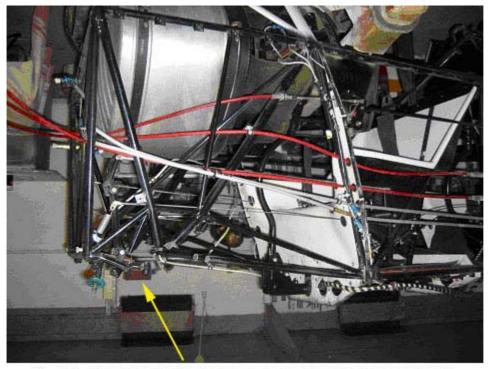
Damage to tubular steel structure around spring beam attachment (cross bar removed)
